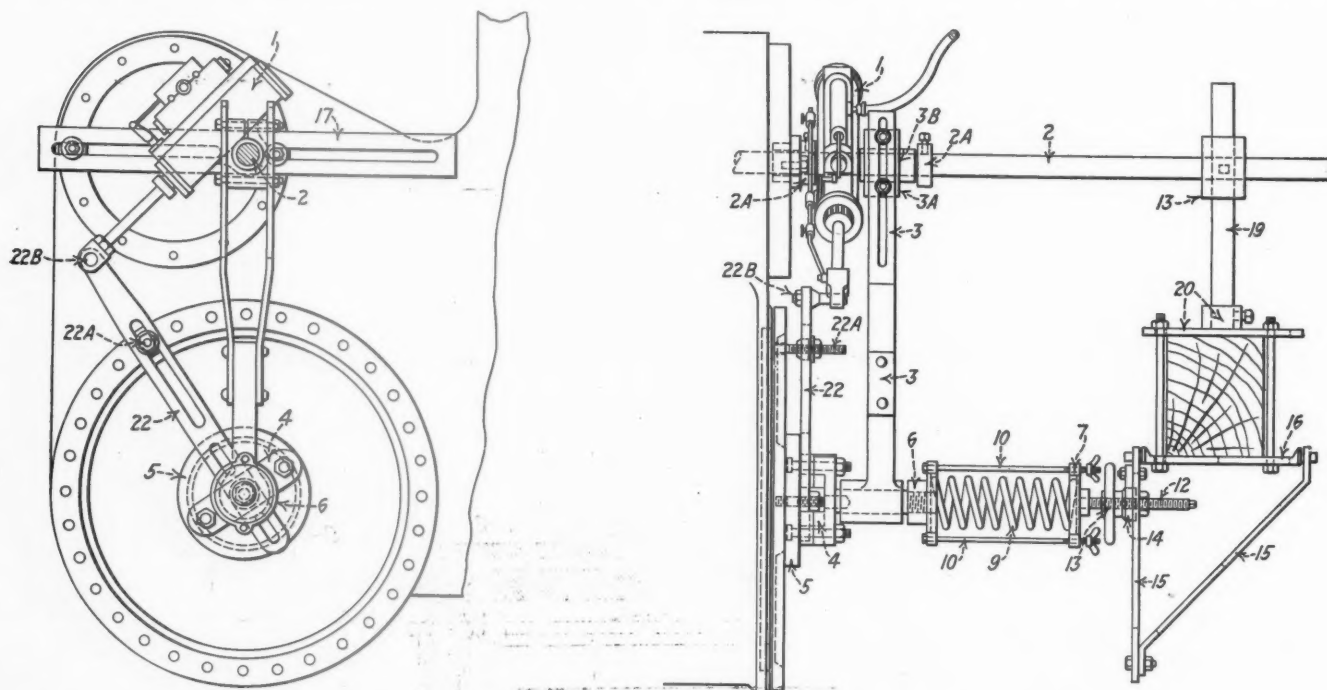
Method of applying apparatus when grinding in front cylinder heads
